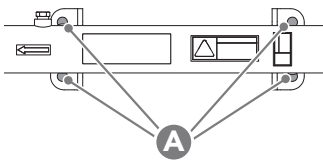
Modular CLV tank assembly .375 inch (9.5 mm) diameter mounting holes × 4 (A).
